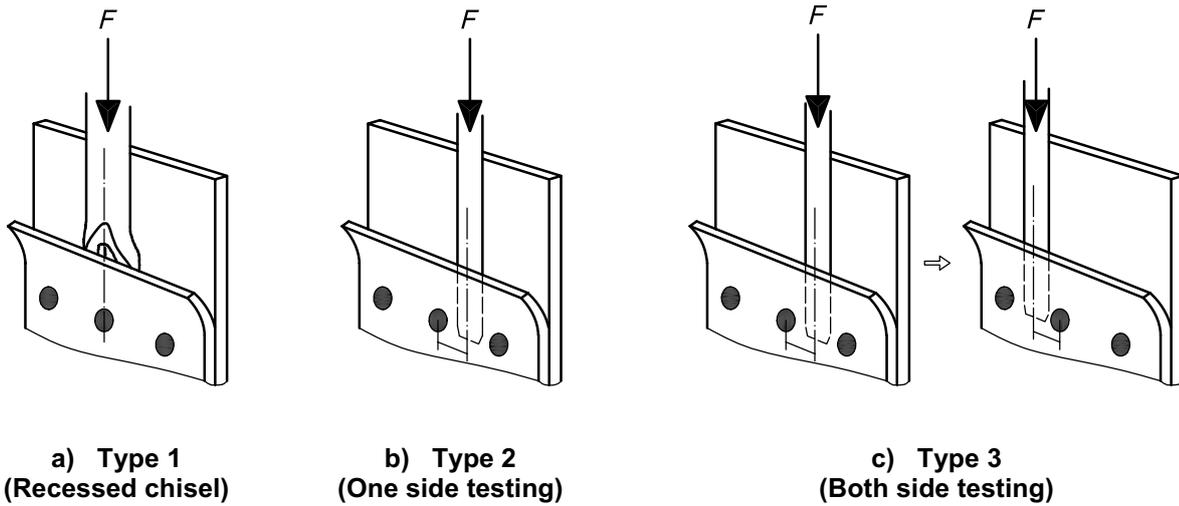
Chisel routine test on resistance spot and protection welded joints
